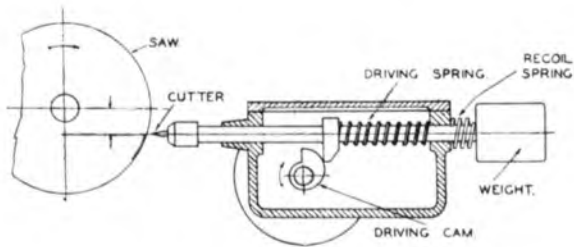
PRINCIPLE OF NOTCHING MACHINE.
